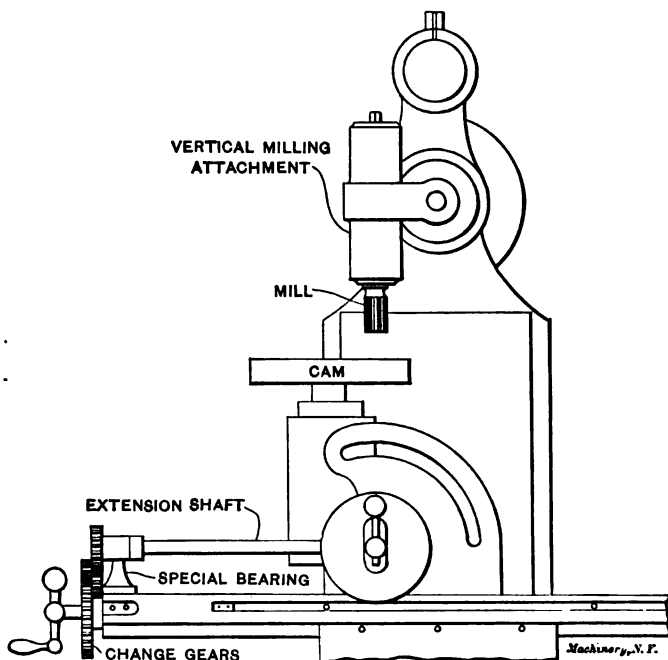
Cutting a Face Cam of Uniform Rate of Throw
